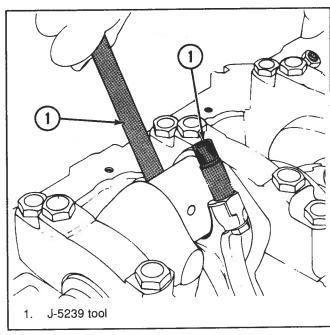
Pulling Piston And Connecting Rod Into Place
